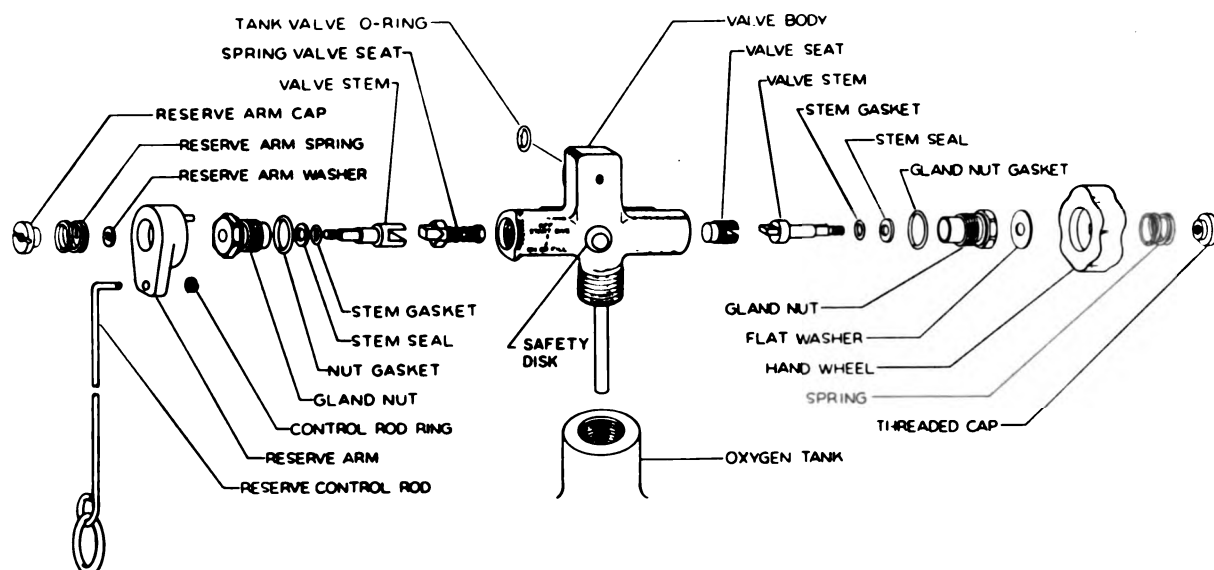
Cylinder and constant-reserve valve (exploded view).
